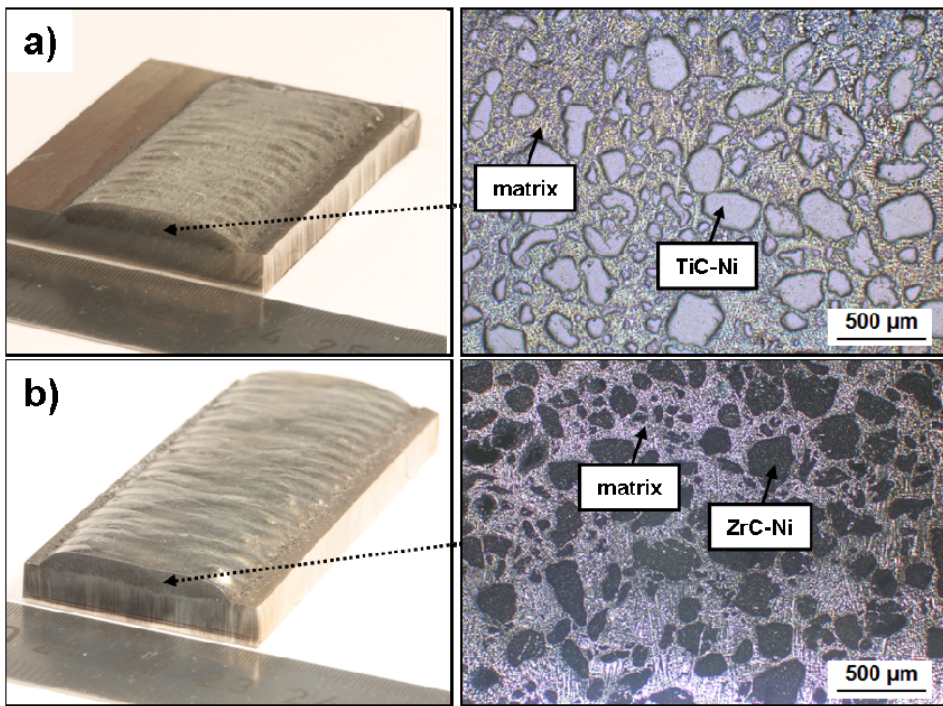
Weld seam analysis and optical microscopy images of a) TiC-Ni reinforced hardfacing; b) ZrC-Ni reinforced hardfacing
